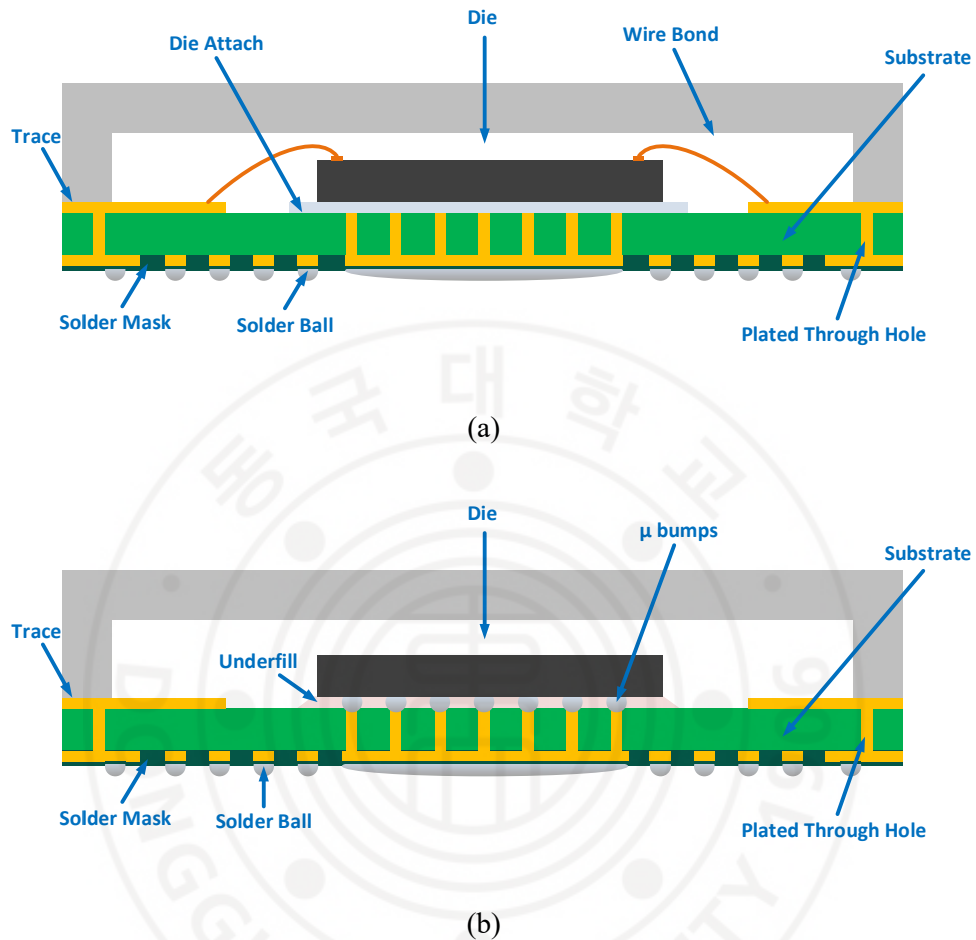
Cross-sectional view of BGA(Ball Grid Array) package ; (a) Wire-bonded BGA, (b) Flip-chip BGA
